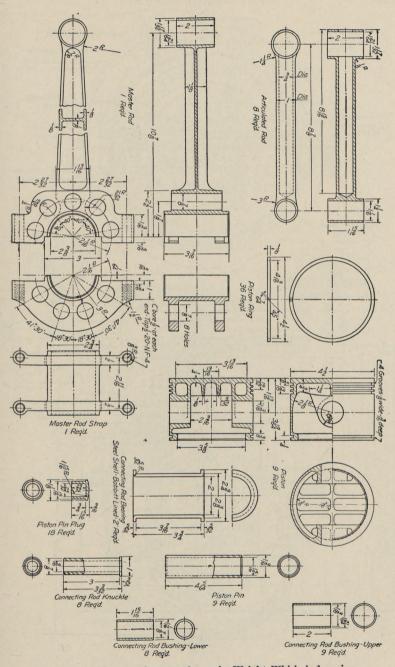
Piston and connecting rods, Wright Whirlwind engine.
